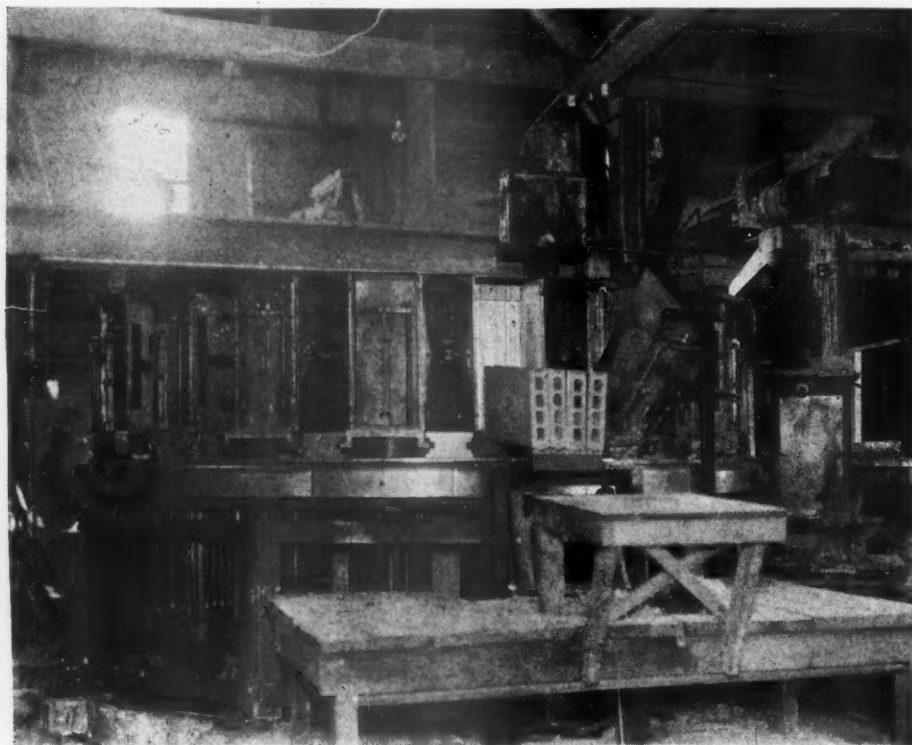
Showing the discharge end of the rotary machine pictured in Fig. 12
